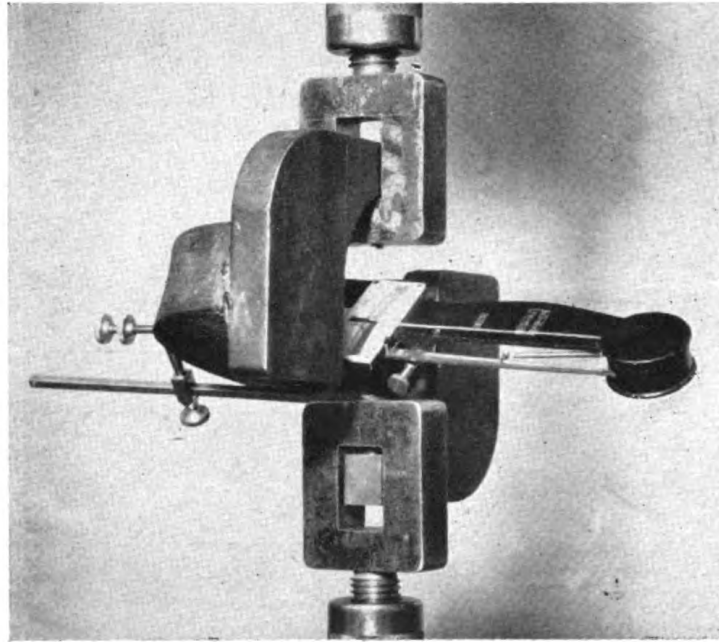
Semicoil of square-wire helical spring in position in testing machine
